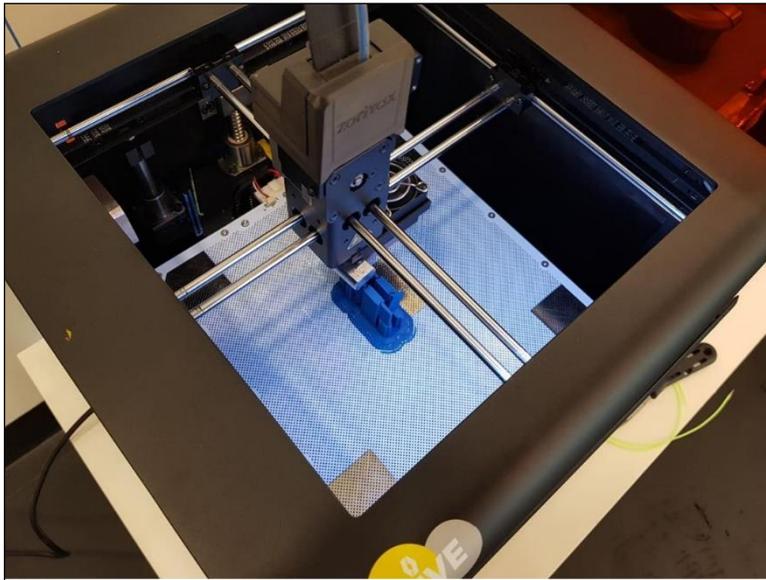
The manufacturing process using FDM technology for the Cable Fixing Clamp
